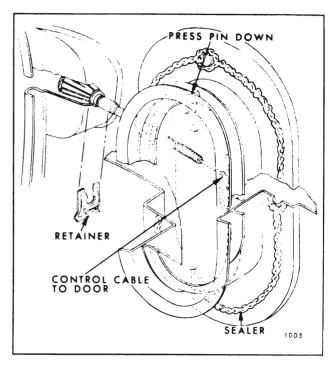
Shroud Side Finishing Panel and Air Outlet
